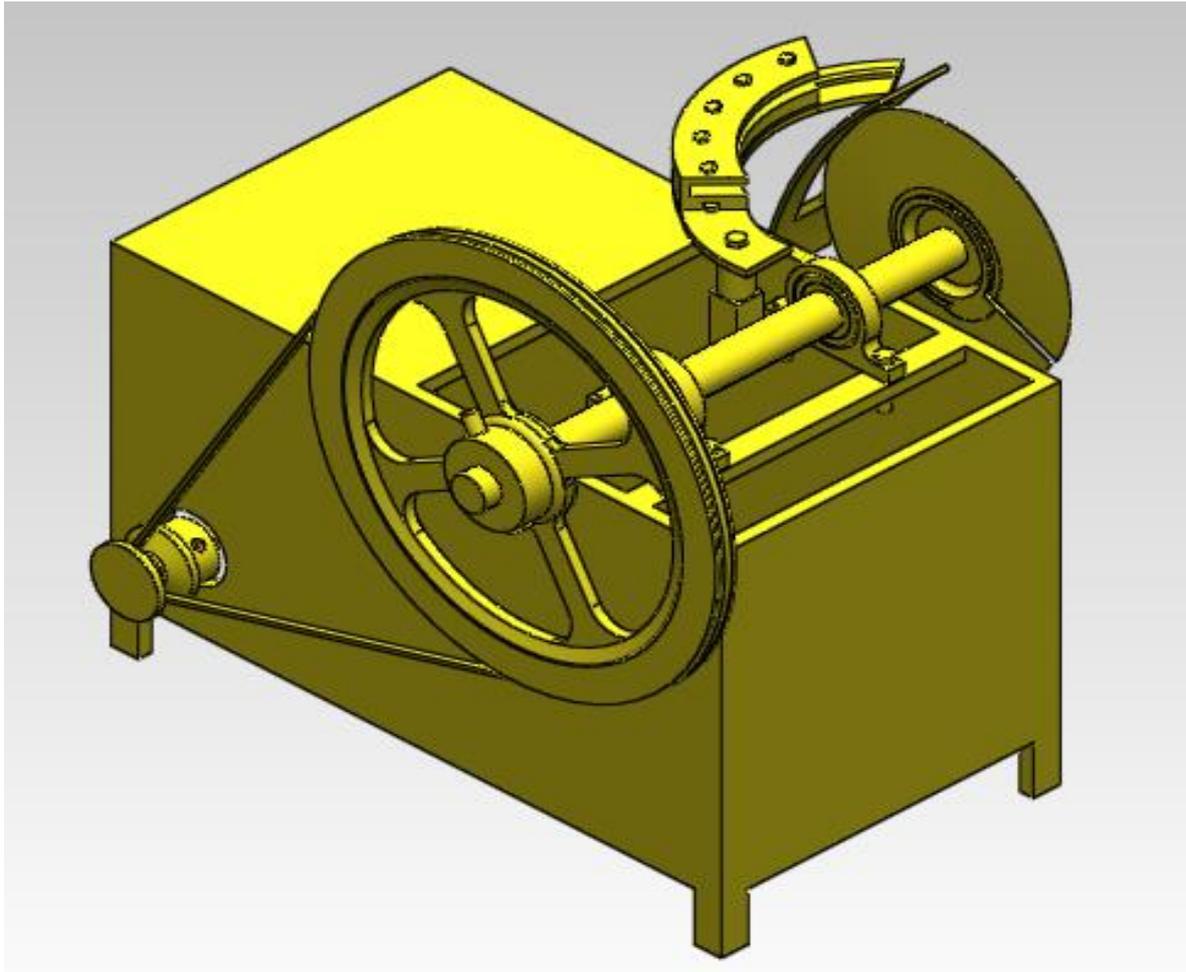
Special Purpose Machine for Sickle Teeth Regeneration
